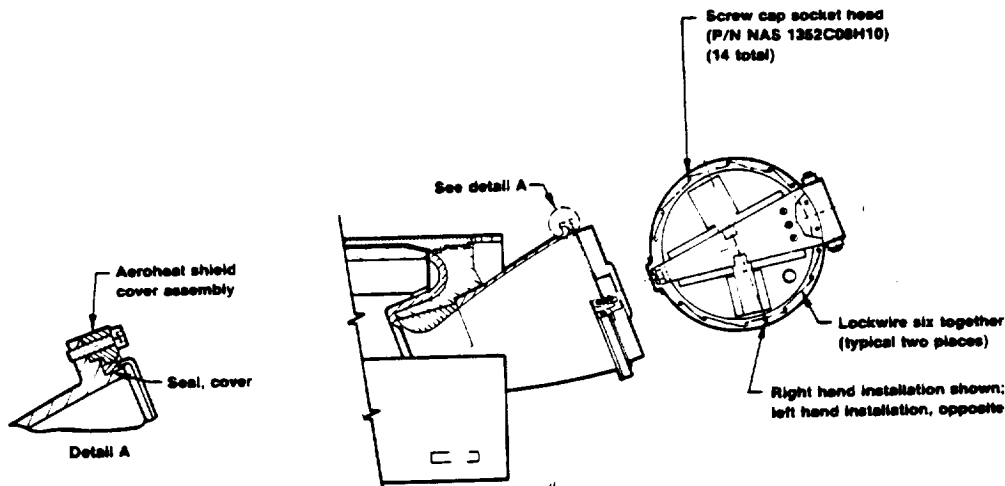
Hinged Cover Assembled to BSM Exit Cone.
